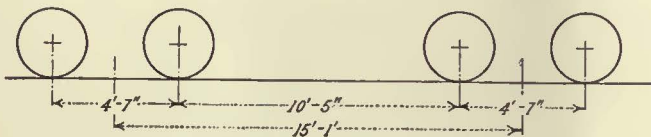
Arrangement of Axles of the Motor Car Shown in Fig. 2 After Conversion for Trolley Operation
